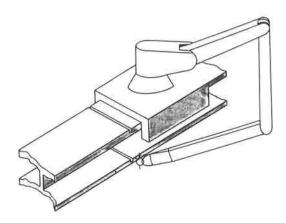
Robot setup for welding steel girders (10).
